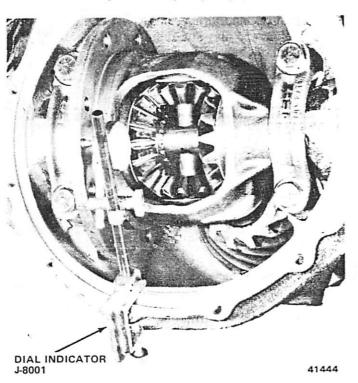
F-42 Checking Ring Gear Mounting Surface of Case for Runout
